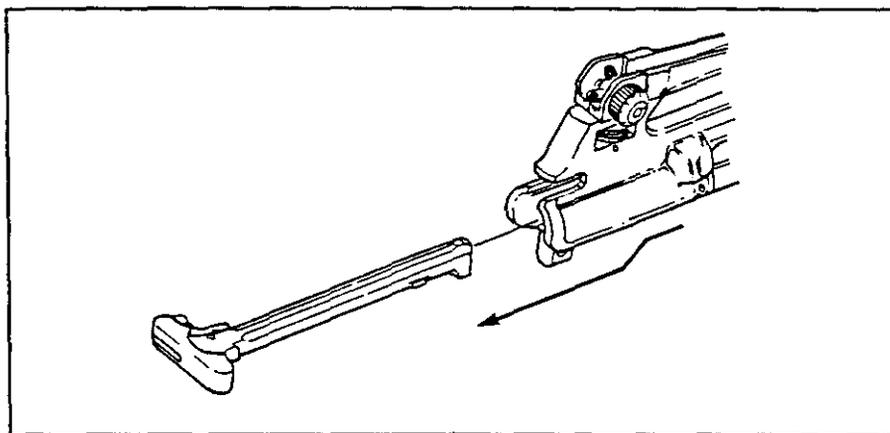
BOLT CARRIER ASSEMBLY AND CHARGING HANDLE REMOVAL
